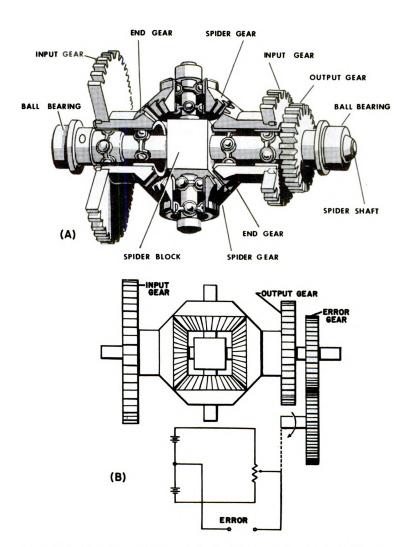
Mechanical differential. (A) Cutaway drawing; (B) schematic.
